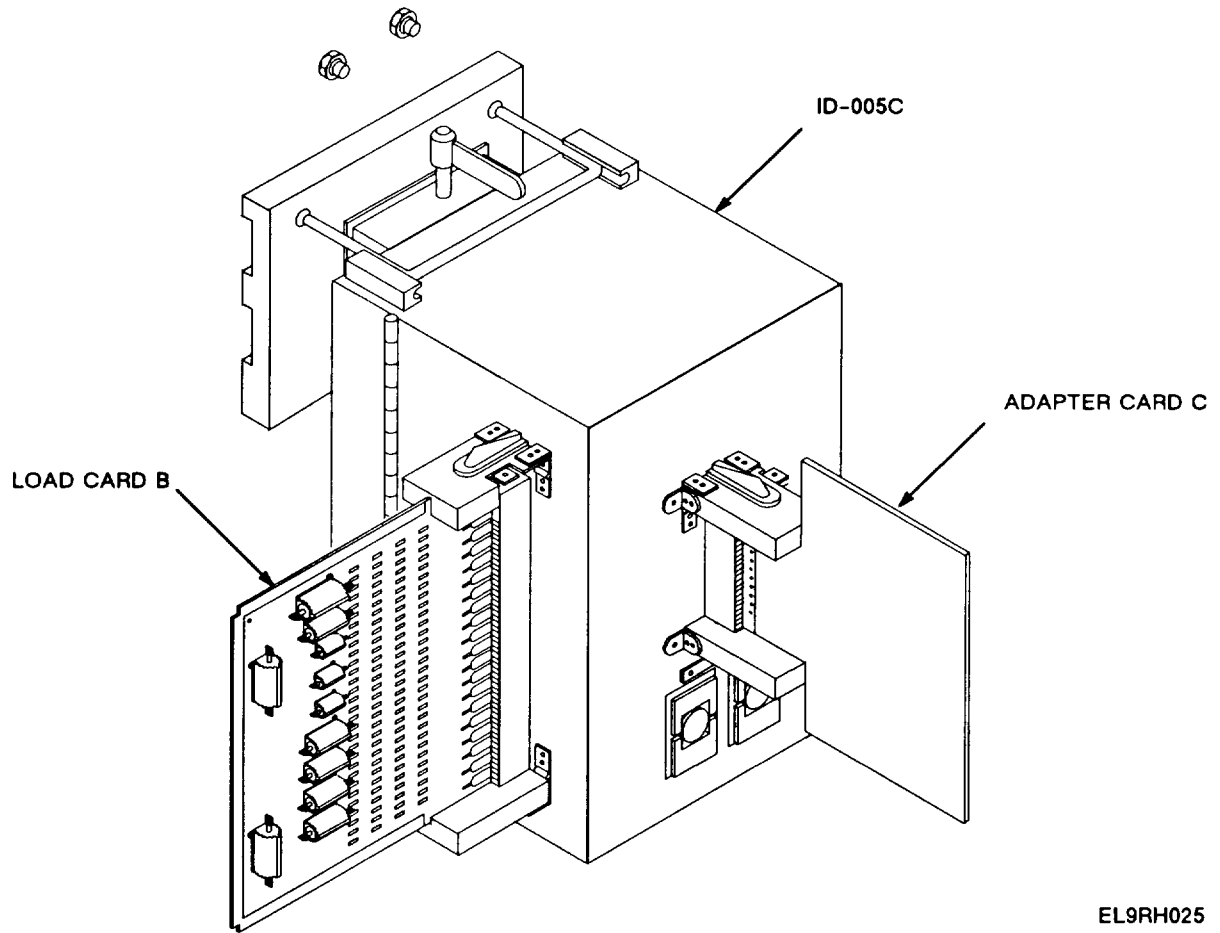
Installation of Load Card B for Power Supply-Module Assembly
